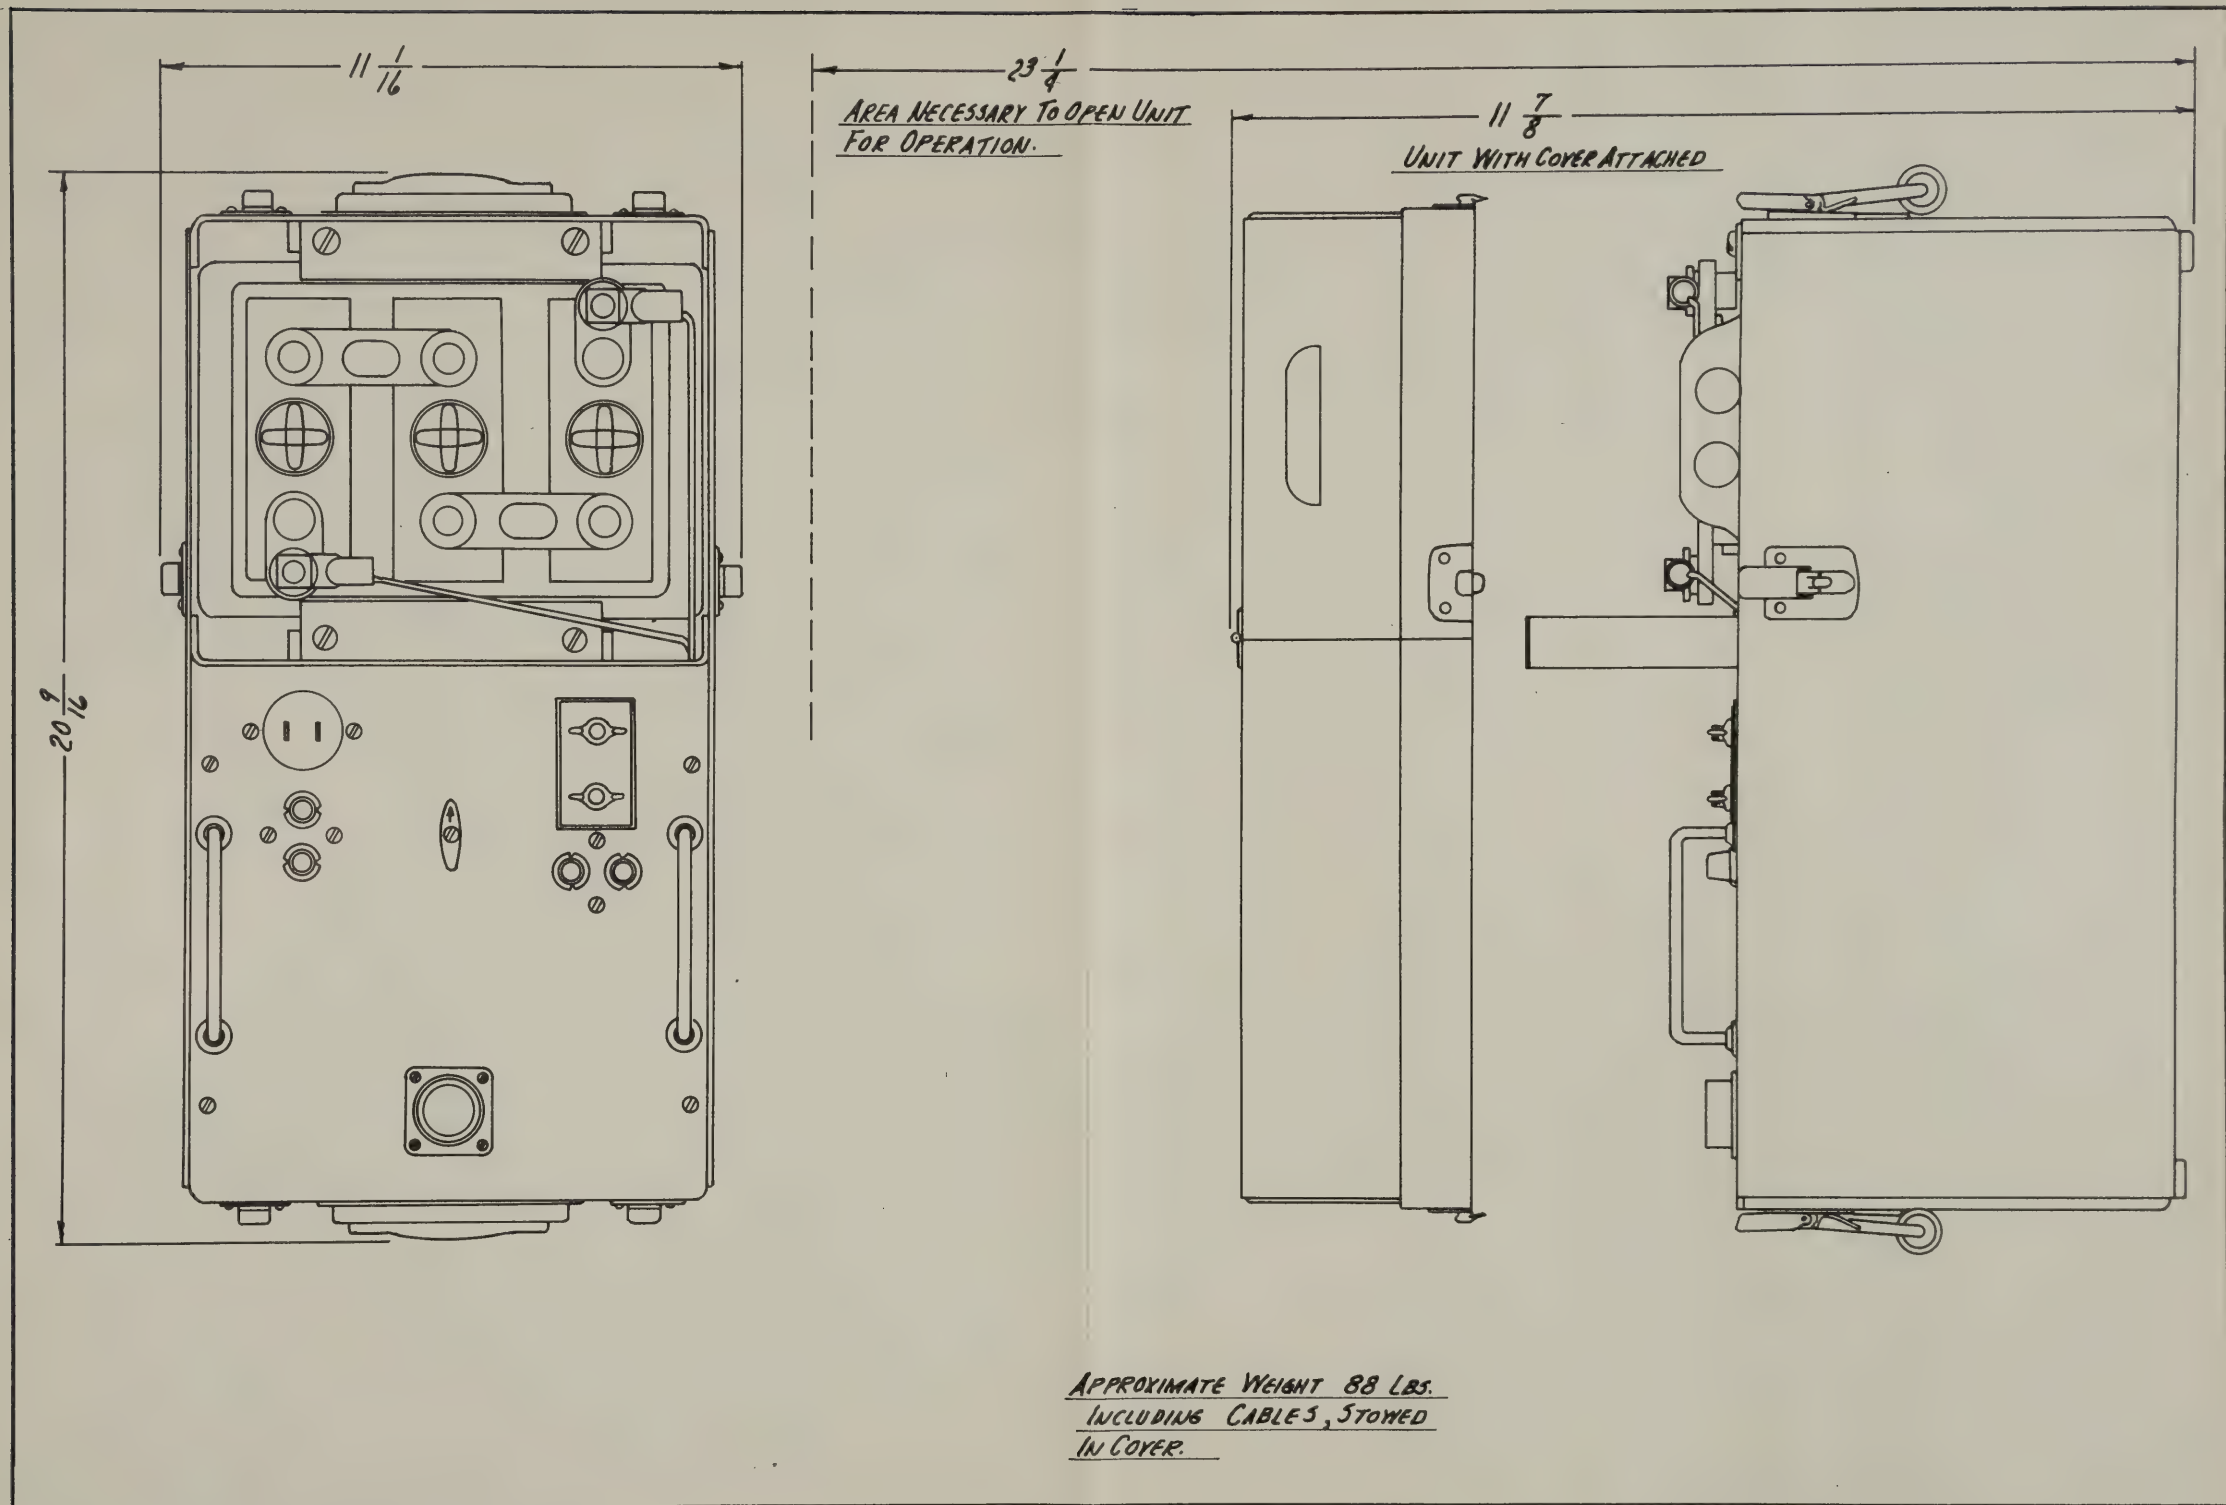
Outline Drawing, Power Supply PP-287/U
